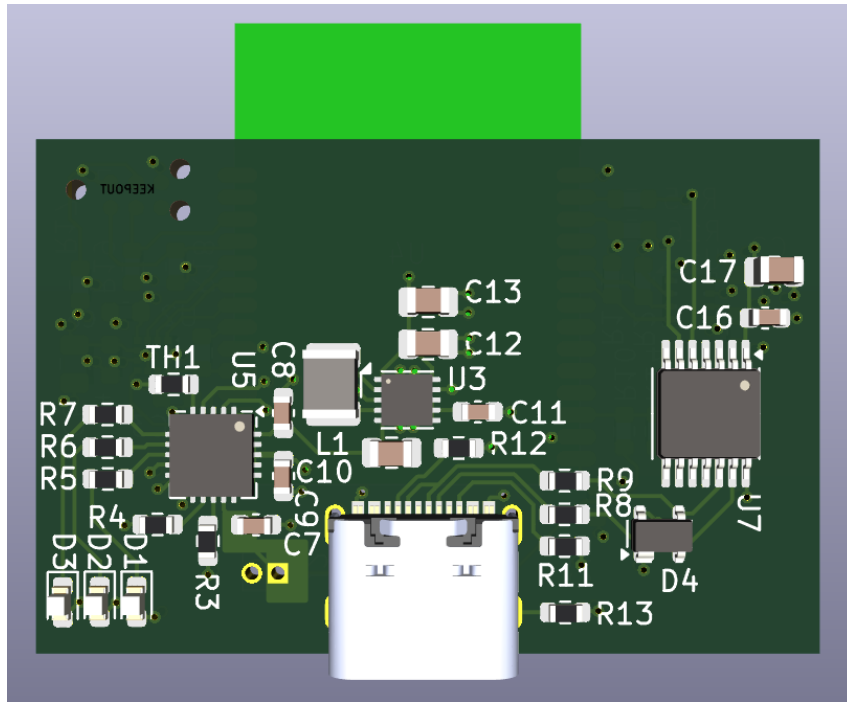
3D render of the assembled PCB (angled perspective) illustrating the mechanical layout and overall compact design.
